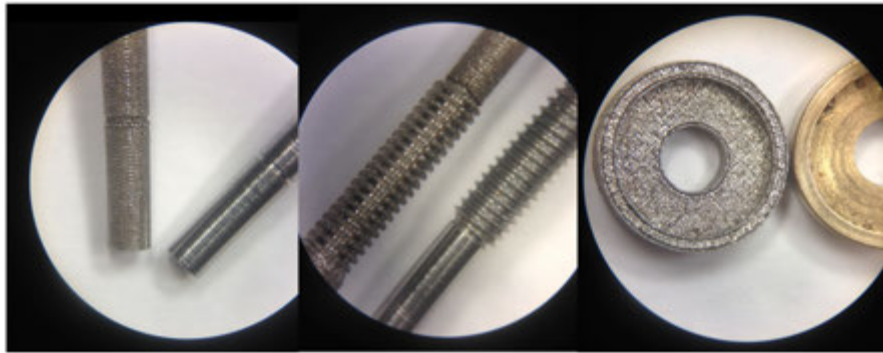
Comparison of the printed shafts and the parts produced on (CNC) lathe
